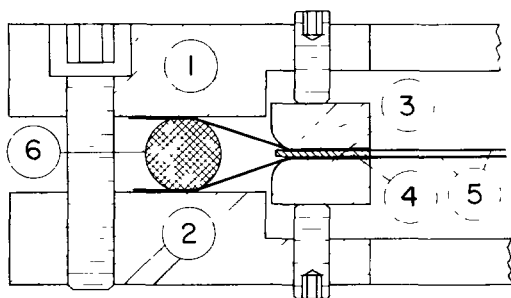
Cross section of assembled sample holder. 1. upper body; 2. lower body, 3. clamp rings, 4. spacer ring; 5 foil windows, 6. Teflon O-ring.
